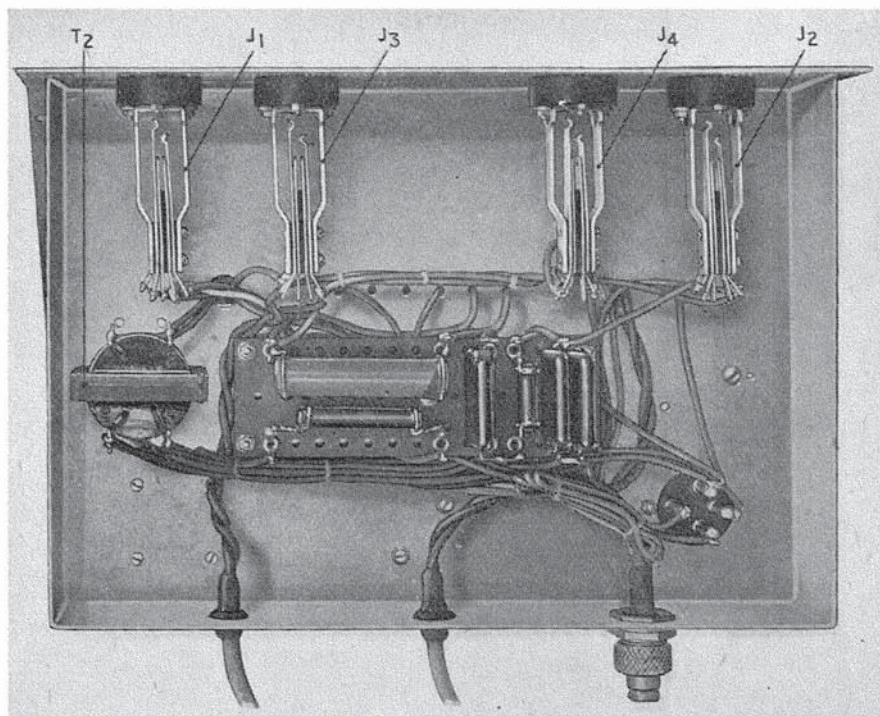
UNDERSIDE VIEW OF CHASSIS
